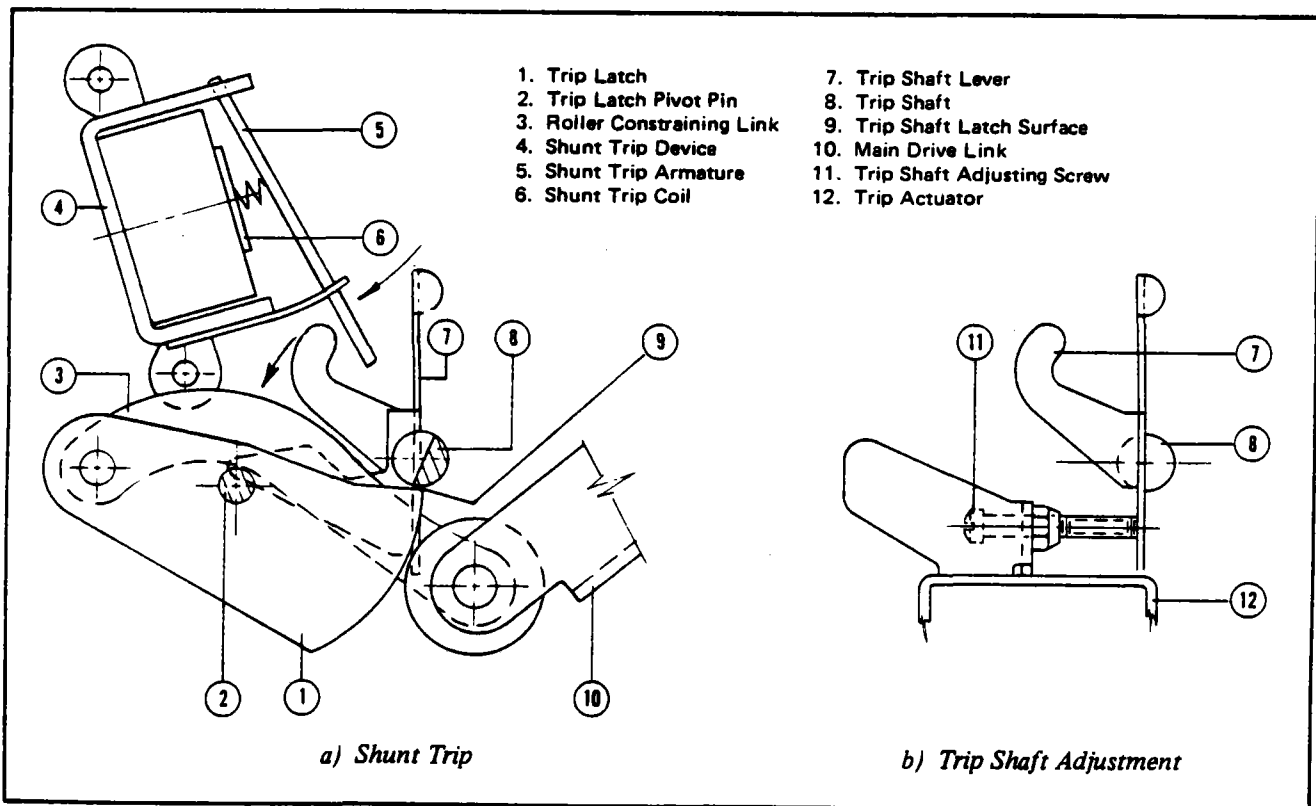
Shunt Trip Details Showing Trip Shaft Adjustment
